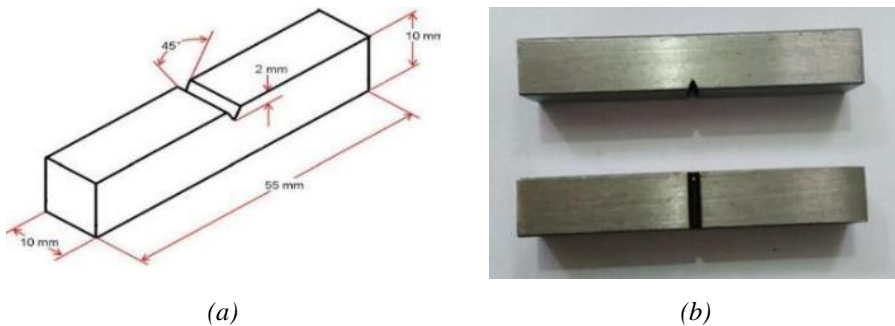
(a) Standard Charpy impact specimen dimensions as per ASTM A370, (b) machined impact specimen.
